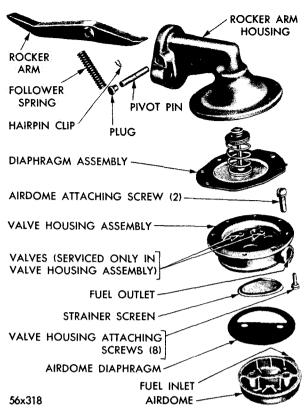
Fuel Pump (Exploded View Model M 961 S)
